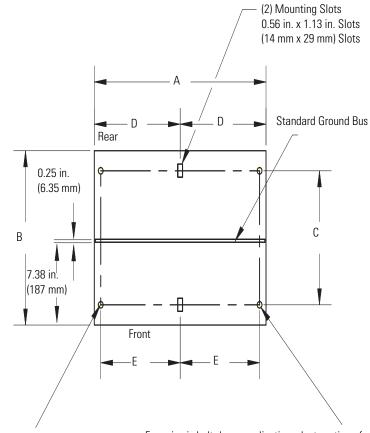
Mounting Dimensions for 15 in. and 20 in. Sections - continued
